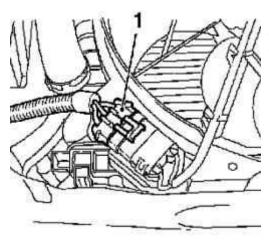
Wiring harness connector module cooling: 1 - connector
